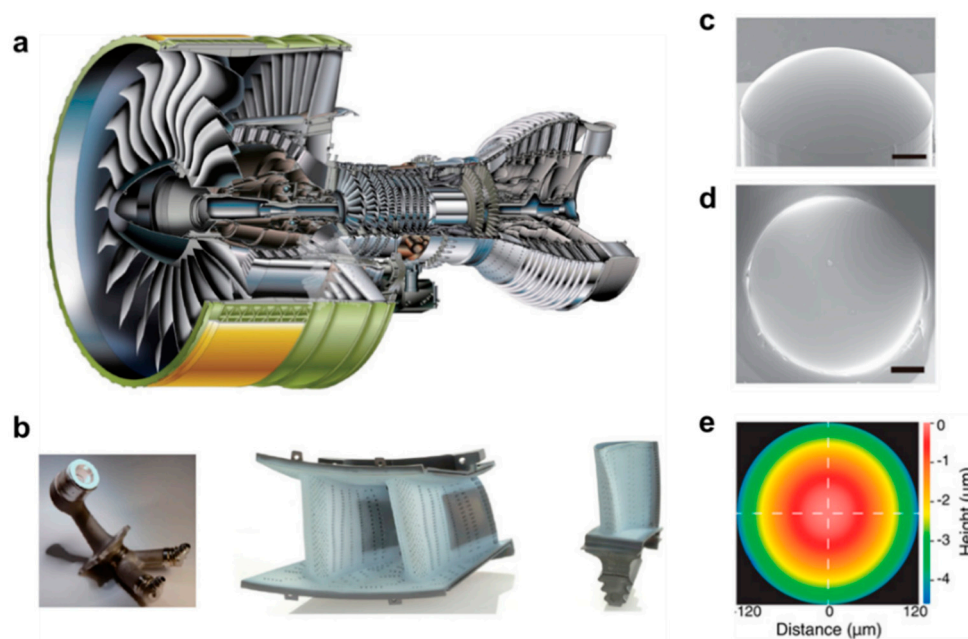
(a) Jet engine fabricated by 3D printing application; (b) 3D-printed jet engine parts. From left figure, there are fuel nozzle, high-pressure turbine nozzle, high-pressure turbine blade (Adapted from [7]. Copyright (2017) Elsevier); (c) Tilted view of SEM image of the 3D-printed optical lens using micro-stereolithography. Scale bar: 500 μm ; (d) Top view of SEM image of the 3D-printed optical lens using micro-stereolithography. Scale bar: 500 μm ; (e) Measured surface profile of the 3D-printed optical lens (Adapted from [13]. Copyright (2020) John Wiley & Sons).
